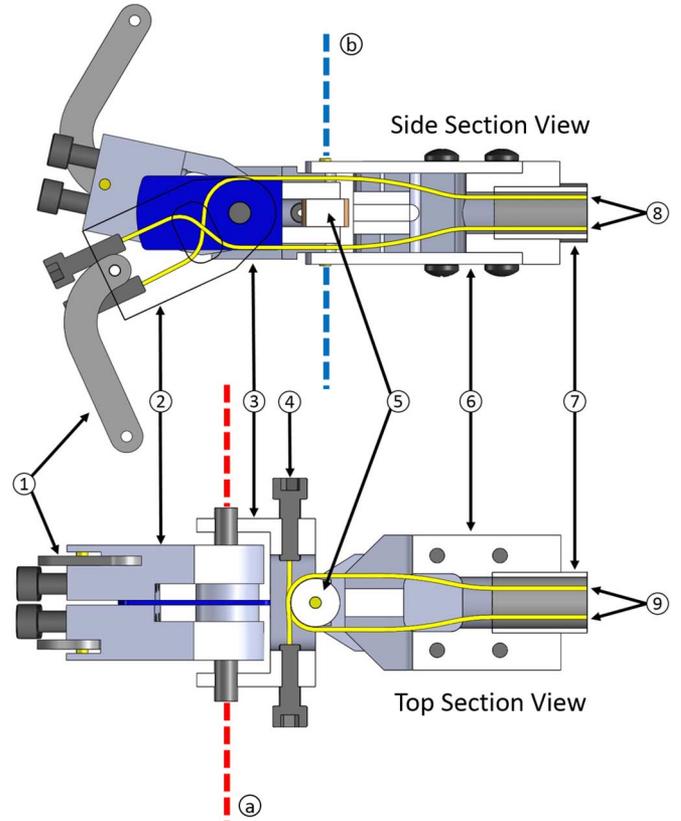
Side and section views of handle mechanism, showing ① linkage connecting pulley arms to handle, ② pulley arms, ③ proximal wrist, ④ vent screw, ⑤ center pulley, ⑥ cable guide, ⑦ rod, ⑧ cables for one gripper of end effector, ⑨ cables for end effector lateral wrist pulley, and control axes.
